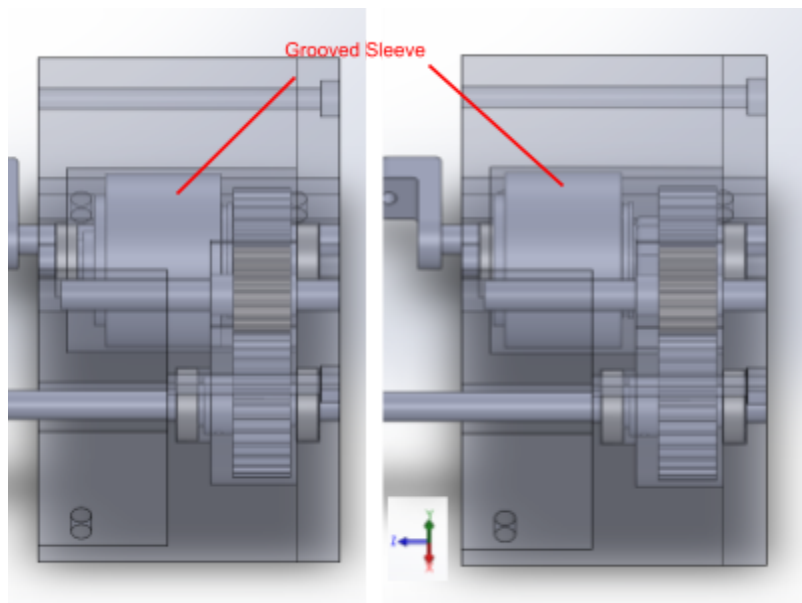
Shows the Grooved Sleeve and the 4WD System Engaged and Disengaged, (Left - Engaged, Right - Disengaged)
